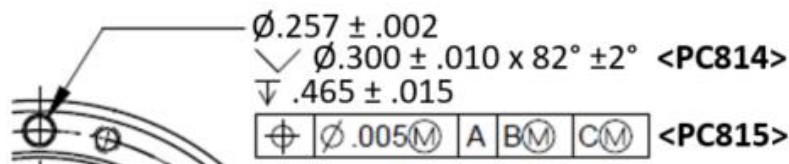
Multi-Facet Dimensional Tolerance
